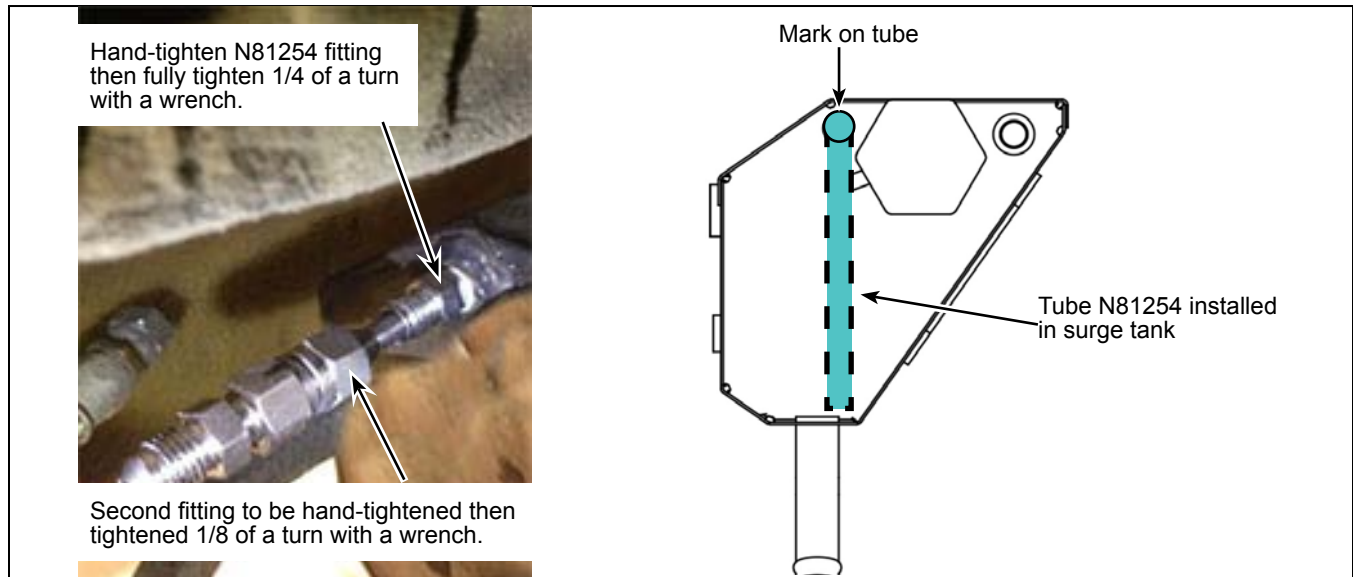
Rigid Supply Tube N81254 Installation on Surge Tank
